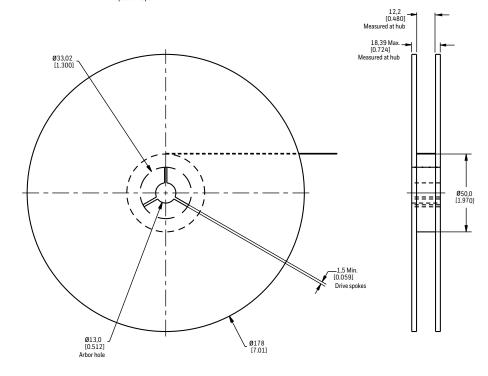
SS490 Series Flat TO-92-Style Mounting and Dimensional Drawings (continued)
